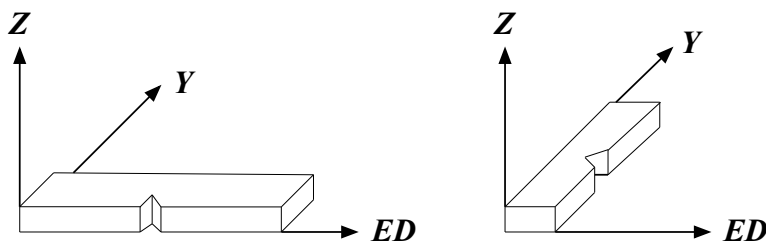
Orientations of the V-notch and the Charpy test specimens in relation to the welding/extrusion direction (ED - extrusion direction).
